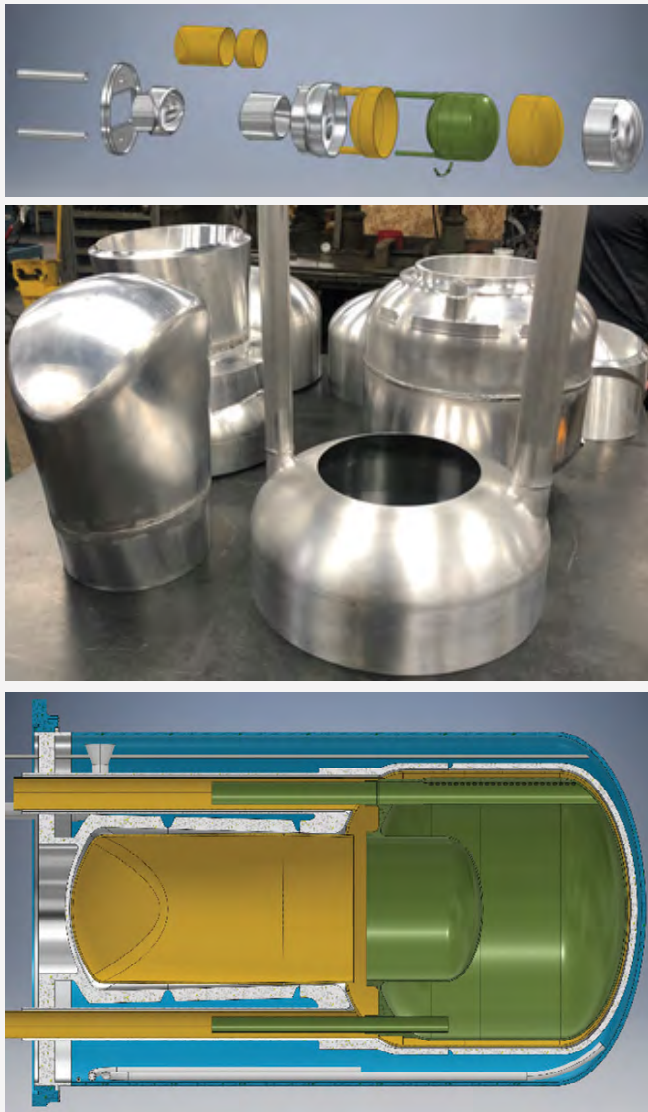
D₂ cold source cryostat components. Top: Exploded view of the downstream end of the cryostat; Middle: completed downstream components; Bottom: cryostat as-assembled. Green corresponds to the moderator, gold to vacuum, silver to helium, and blue to the heavy water jacket.
